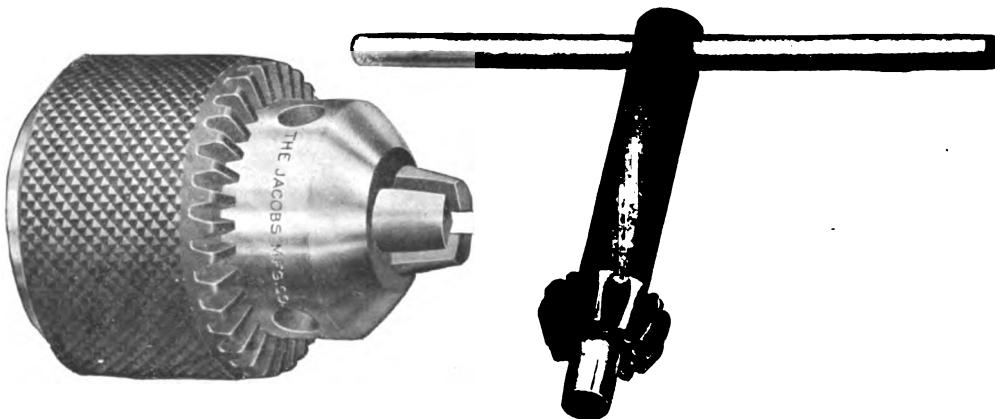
THE JACOBS IMPROVED DRILL CHUCK
